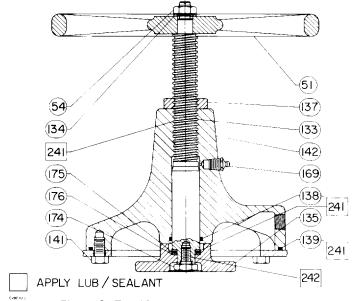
Top Mounted Handwheel Assembly for Size 70 and 87 Actuators
